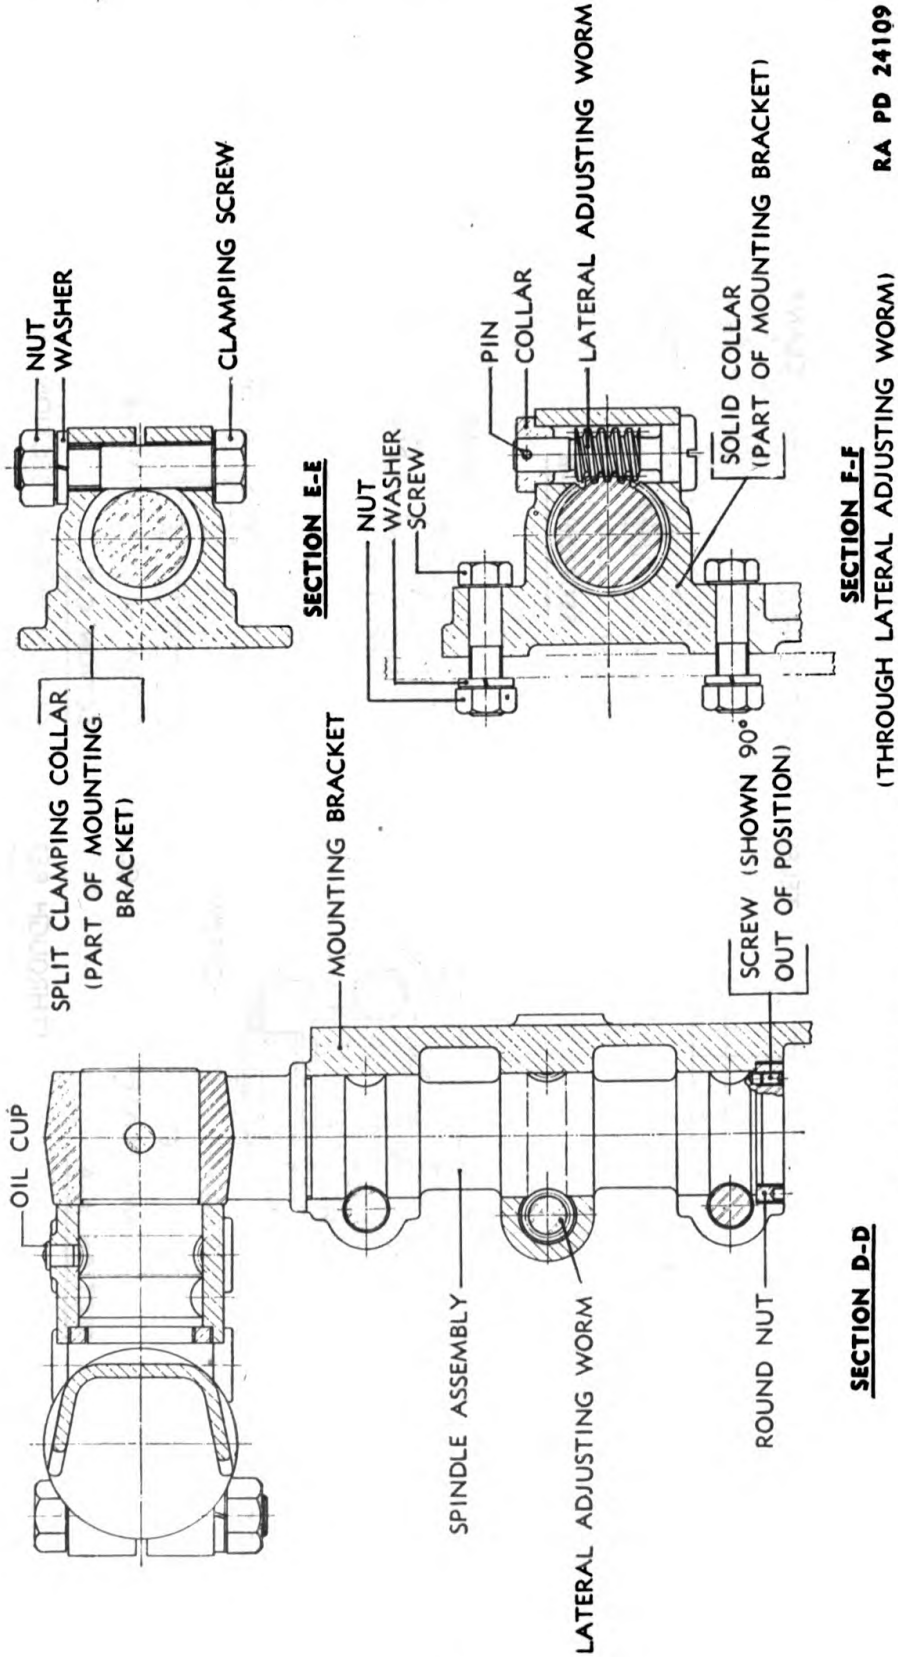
Telescope mount M27, section views D-D to F-F.
